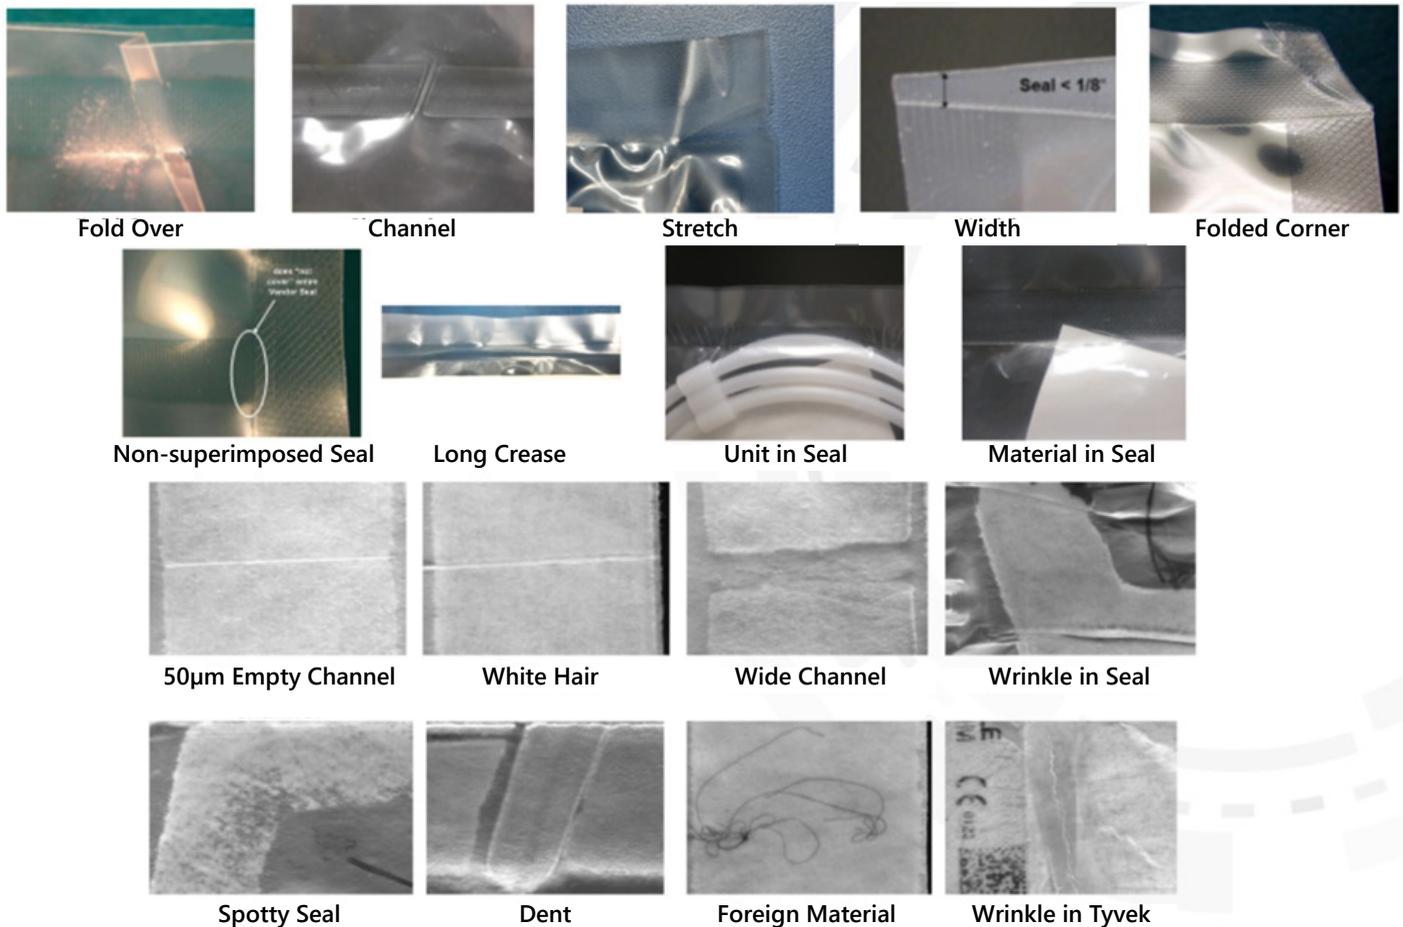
Understanding seal inspection requirements, including defect types, sizes, and packaging materials.
